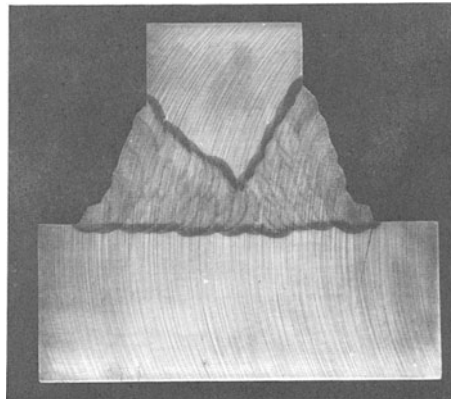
Fatigue Crack at Forward Toe of T-butt Weld.
